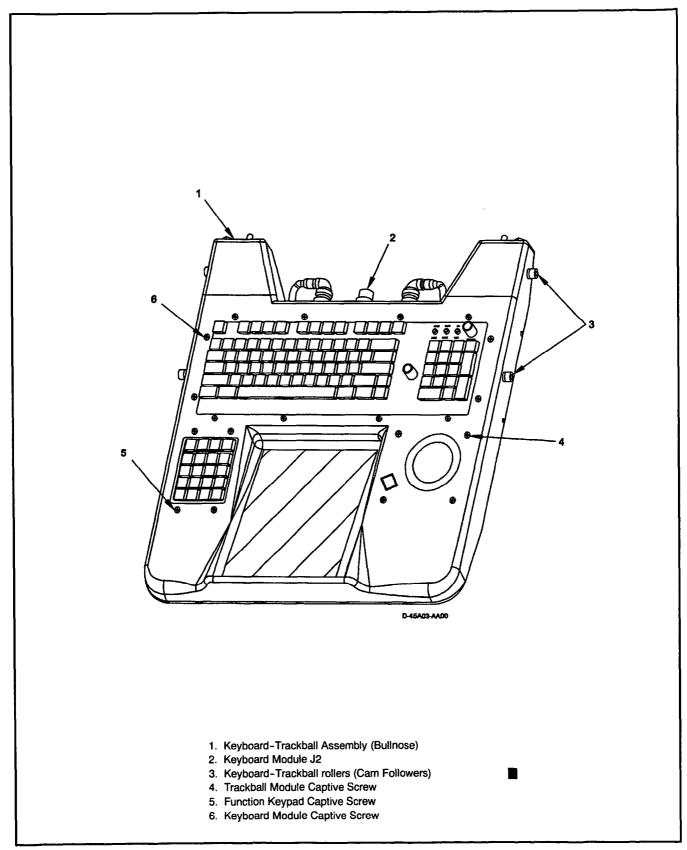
Keyboard-Trackball Assembly CA-103/ASQ-225 (Bullnose) and Control Indicator Set AN/ASQ-225 Components (Sheet 1 of 4)
